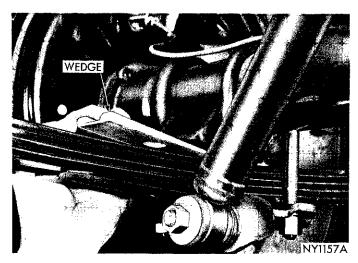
Tapered Wedge Location (Rear Universal Joint Angle Correction)
